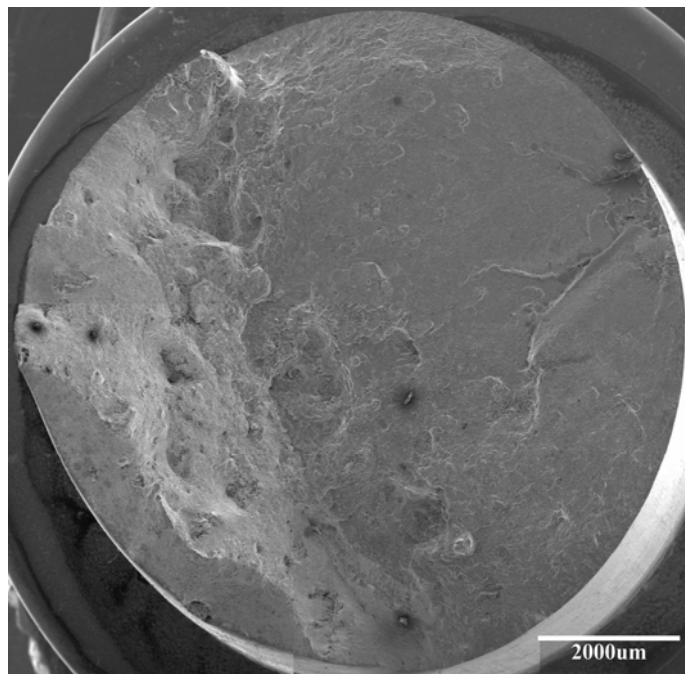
Macroscopic View of a Truncated Cone Specimen Fracture Surface, $S_a = 394$ MPa (Specimen F8)
